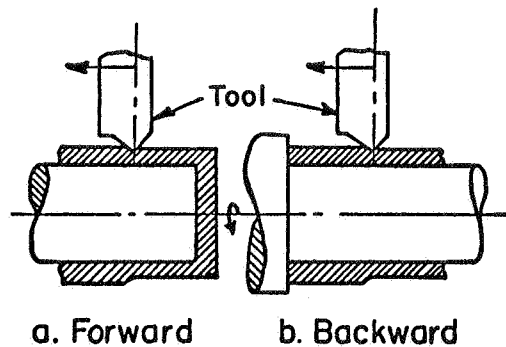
SCHEMATIC OF TUBE SHEAR FORMING (REF. 65)
